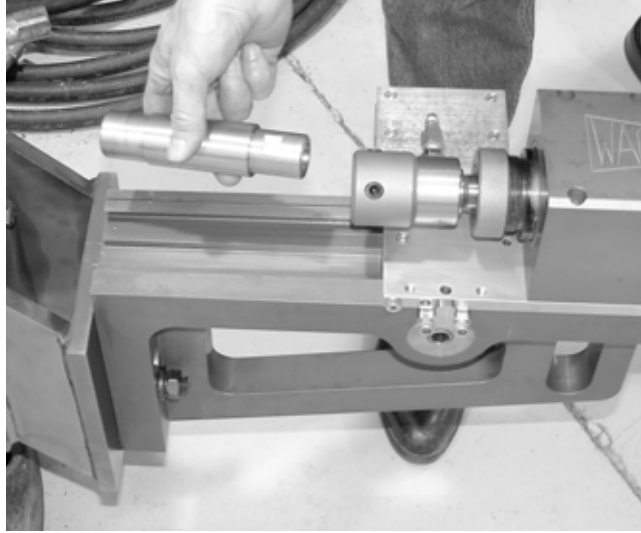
Insert the alignment shaft into the chuck and snug the set screw.
